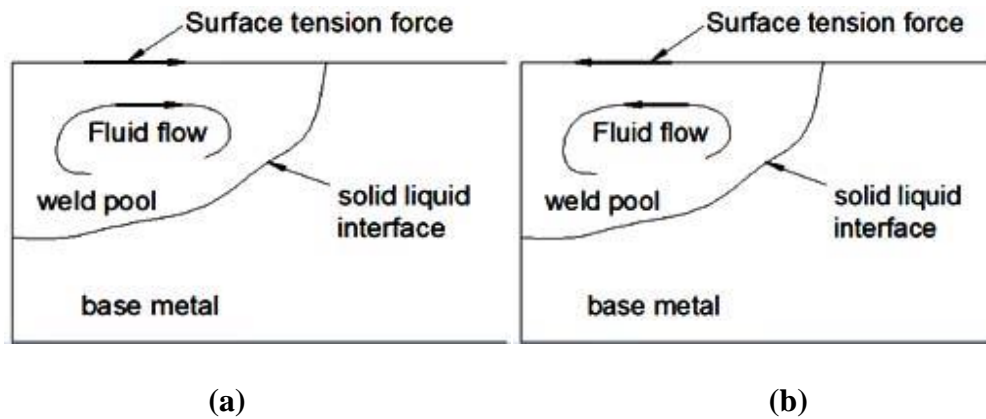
Marangoni force in (a) TIG welding (b) Reverse Marangoni force in A-TIG welding
